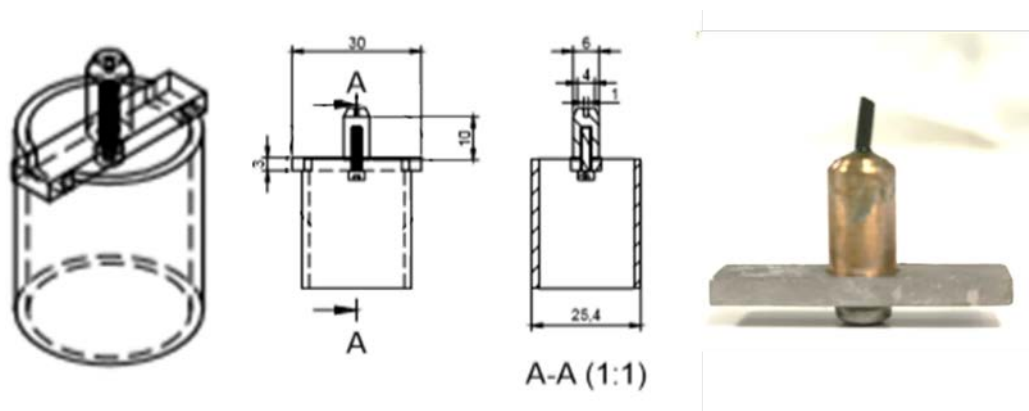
Showing a concept drawing of the pellet stage (left), an engineering drawing (centre) and the fabricated stage (right). All measurements are in millimetres (mm).
